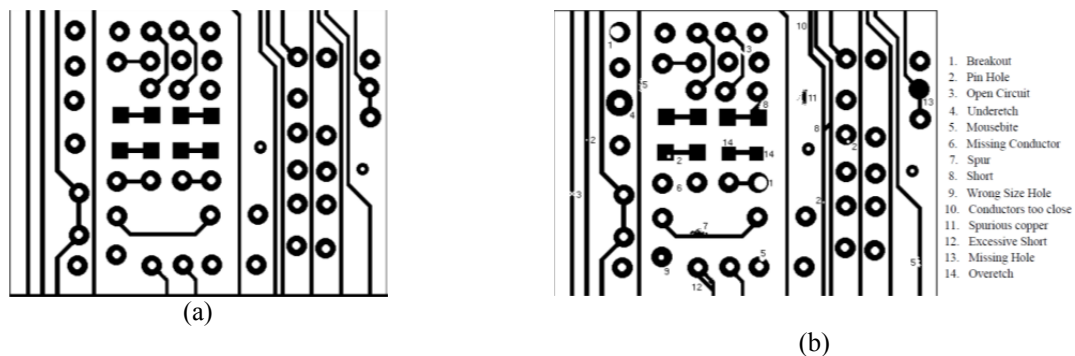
(a) defect free PCB image pattern [6] Fig. 1(b) PCB image with number of defects [6]
